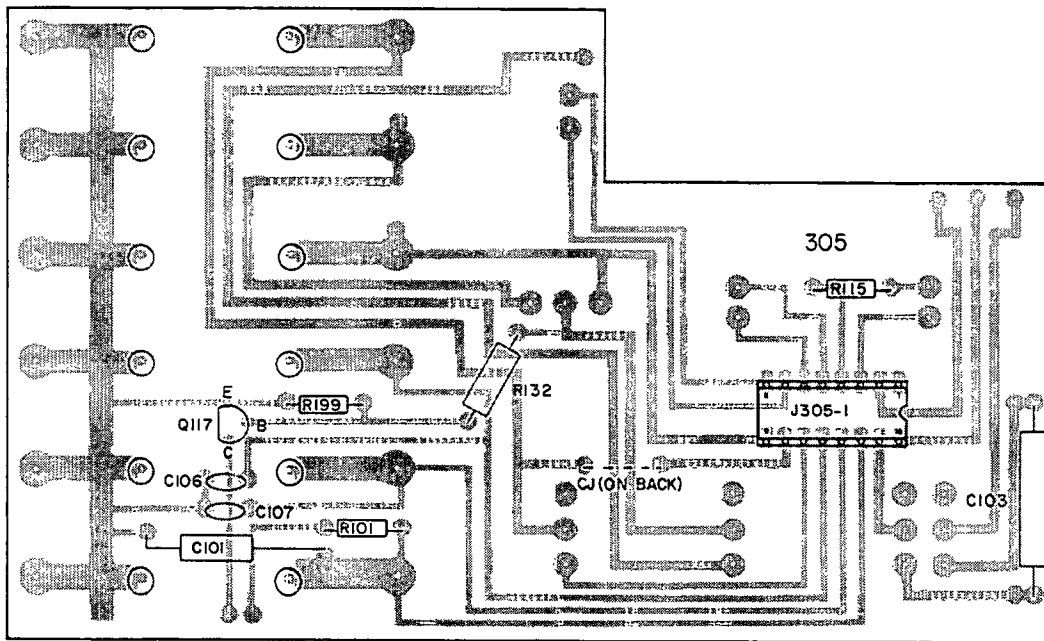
P.C. BOARD ASSEMBLY, BOARD 305, DRAWING
